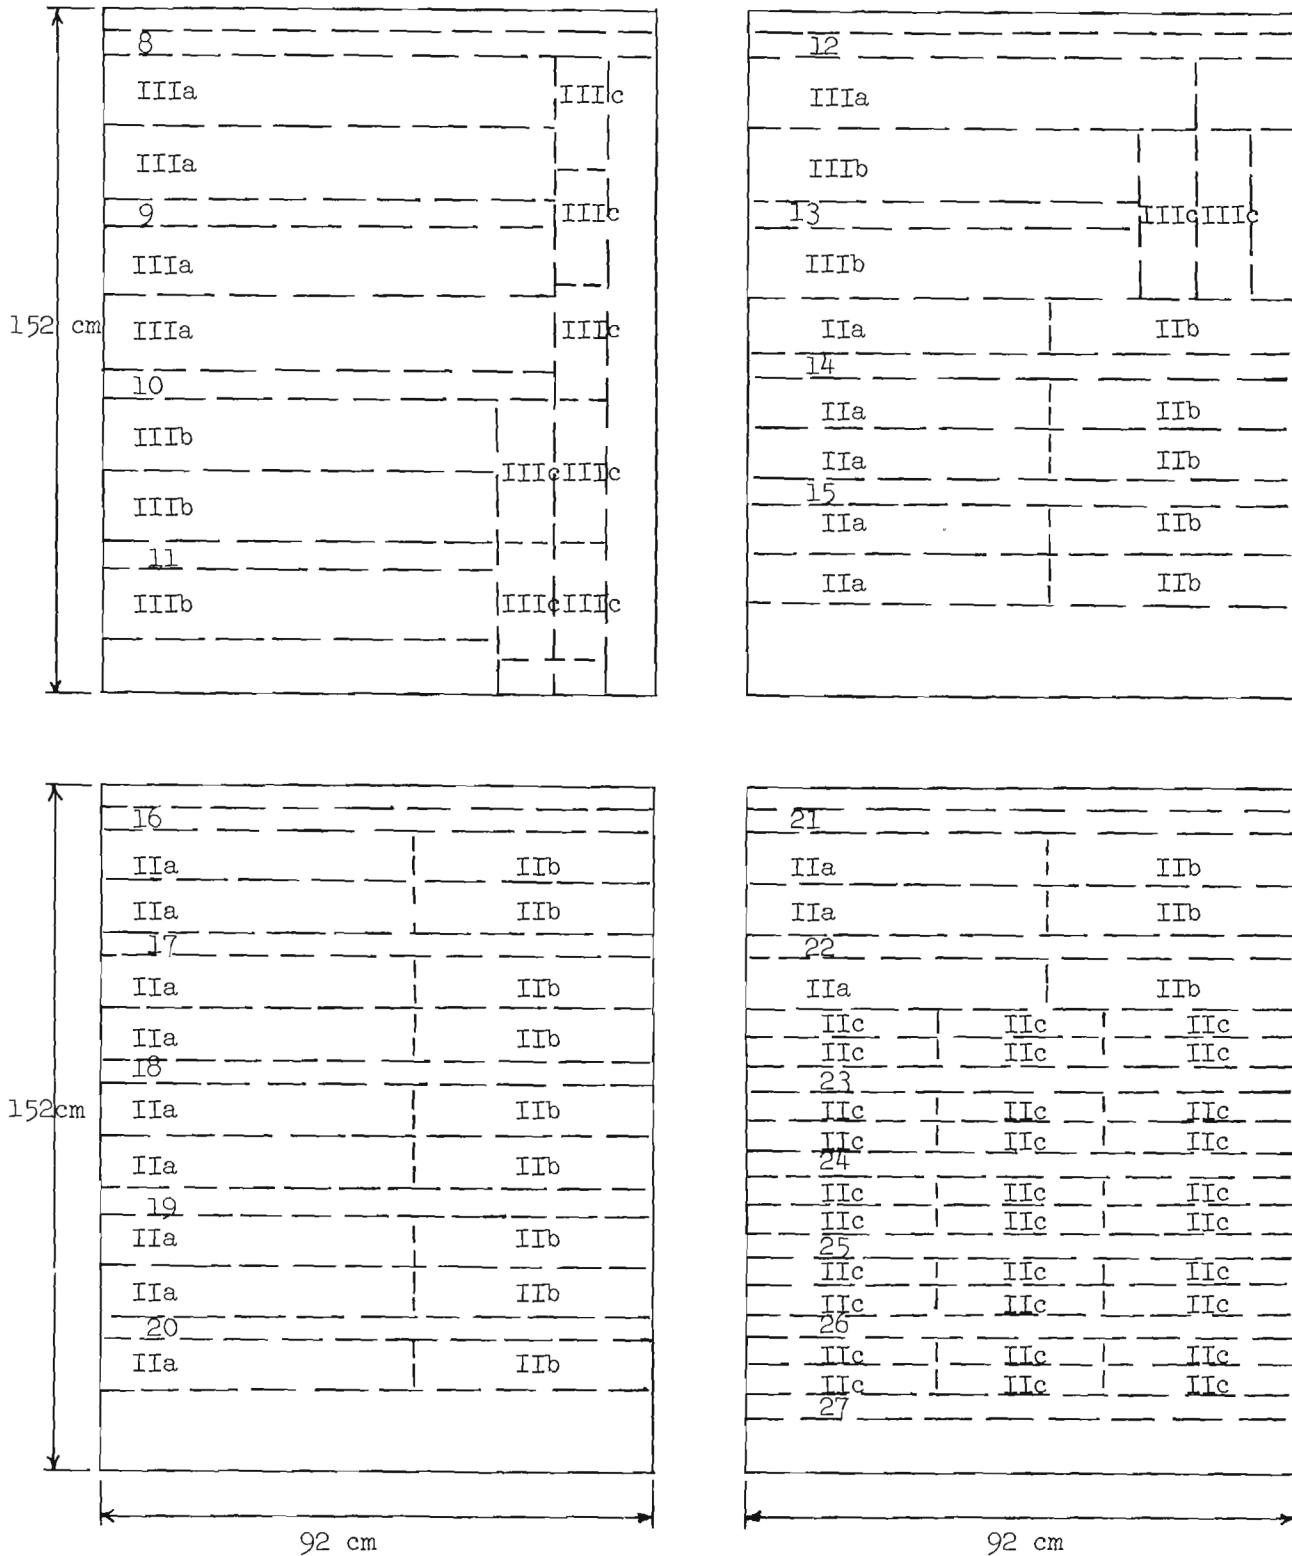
Layout of Components of the Test Specimens from 2.58 cm Steel Plate.
